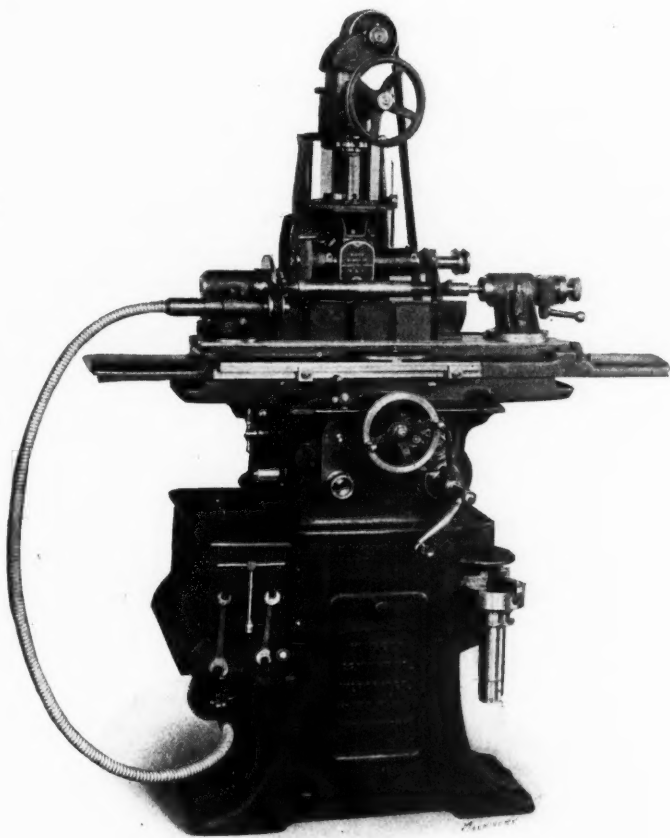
Universal Tool-room Grinder, built by the Walker Grinder Co.
